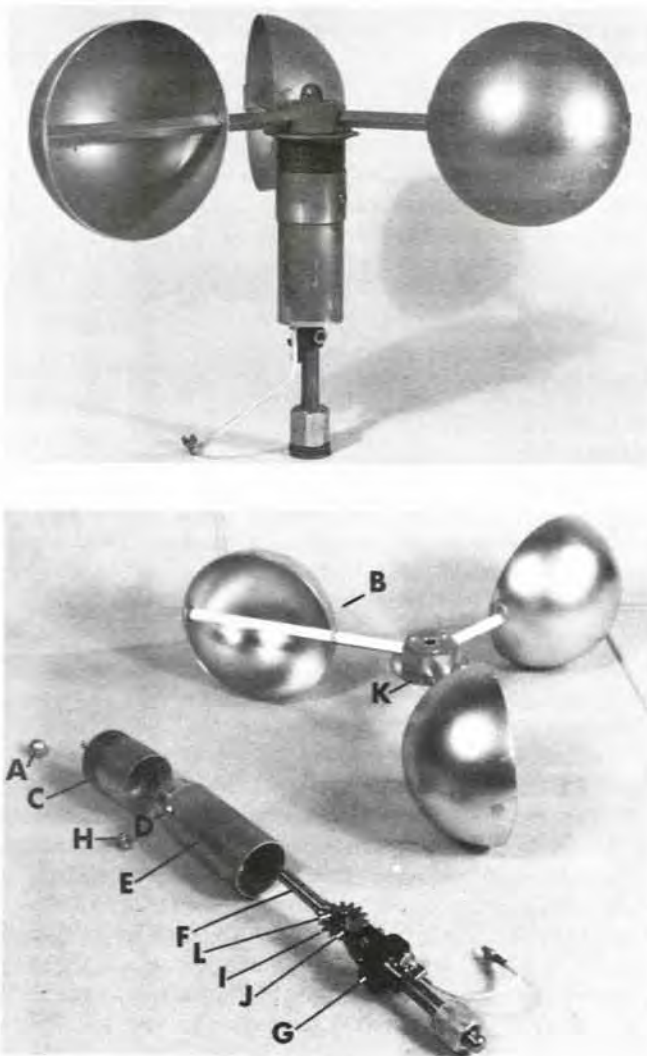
Forester Model 9X140 anemometer, assembled (upper view) and disassembled (lower view): A, cap nut; B, cups; C, cylinder head and stud assembly; D, cylinder-shell screw; E, cylinder shell with internal gear; F, main shaft; G, sprocket gear assembly; H, main shaft oil channel screw; I, sprocket gear; J, contacts; K, balance disc; L, sprocket gear striking pin.
